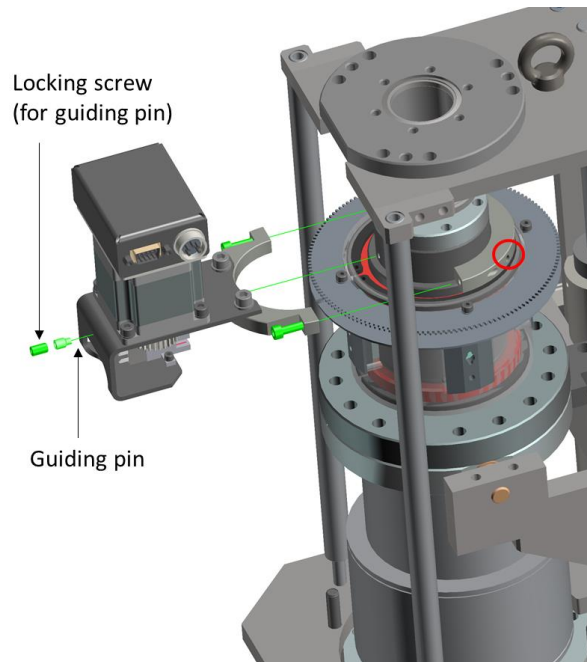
Schematic showing how to remove the rotatory stepper motor (manual transfer system). The guiding pin ensures the correct position of the stepper motor; in some manipulator designs this may be located at the red circle.
